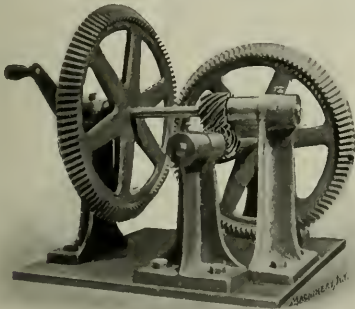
Two Shafts Connected by both Spiral and Skew Bevel Gears.
